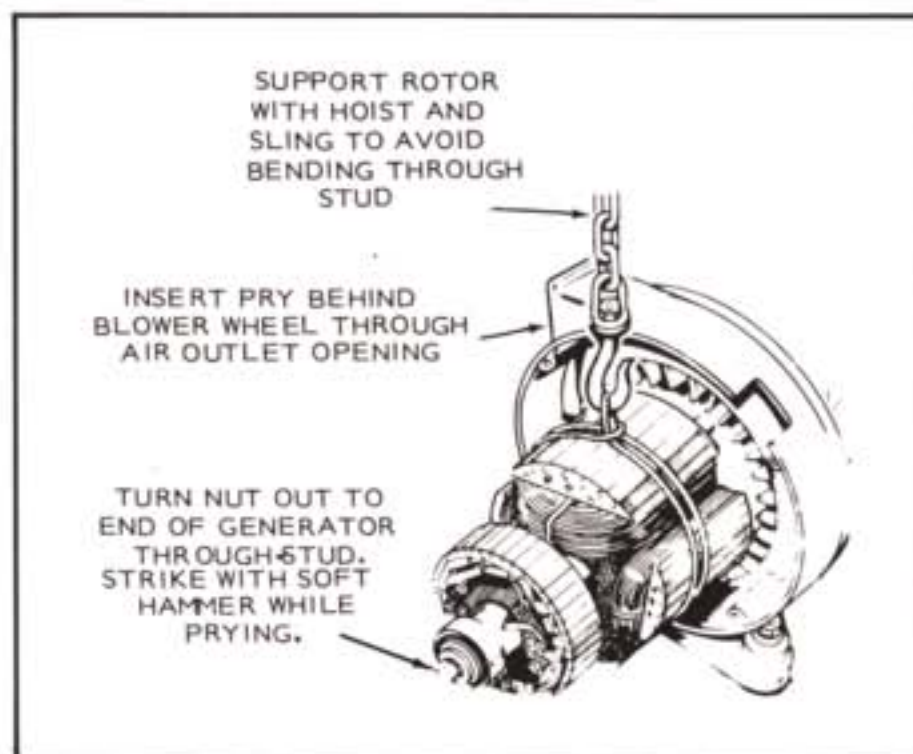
ROTOR REMOVAL (ENGINE MOUNTED GENERATOR)
